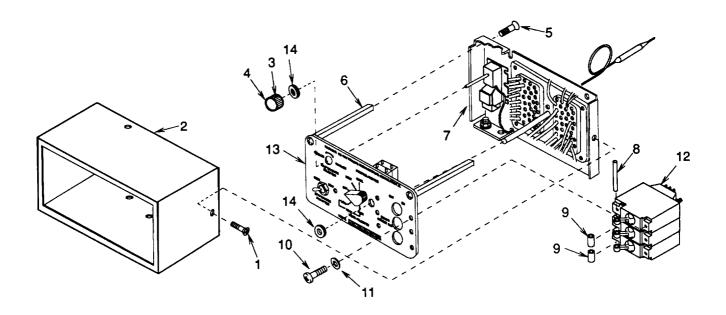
COMPR CIRCUIT BKR (Compressor Circuit Breaker) CB1
